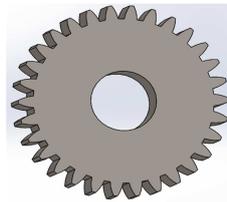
Three-dimensional model of a spur gear by using SolidWorks
